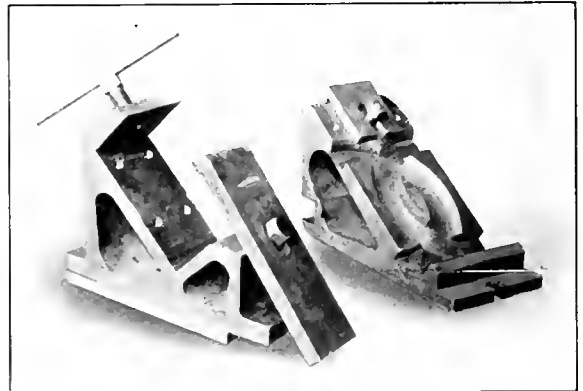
Jigs for Milling Back End Main Rod Brasses
